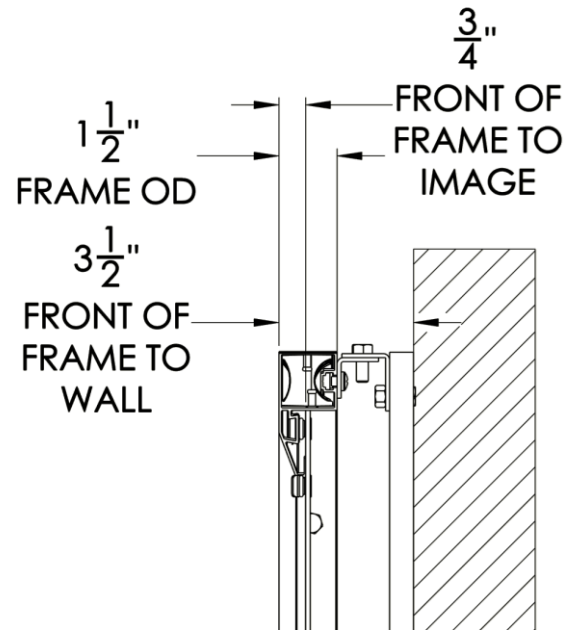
Side view profile drawing of WSDQ showing overall depth of frame when mounted to wall.
